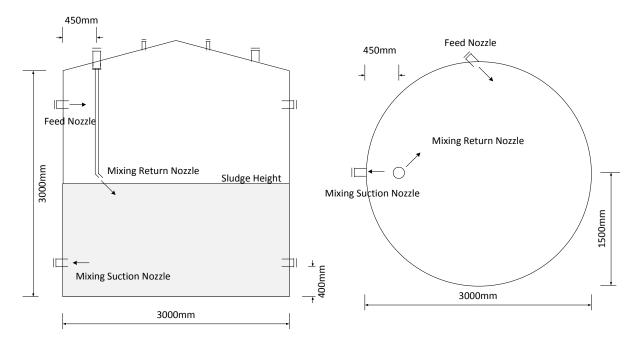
Pre-treatment tank: dimensions, location of feed points, withdrawal points and mixing nozzles
